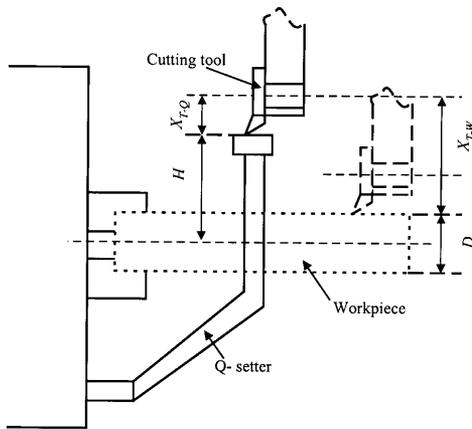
Inspection for the diameter of a workpiece by using the fine touch sensor with the Q-setter of a machine tool.
